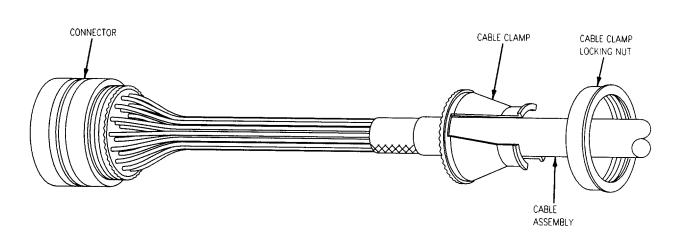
Installing EMI Cable Clamp Locking Nut and EMI Cable Clamp on Cable Assembly
